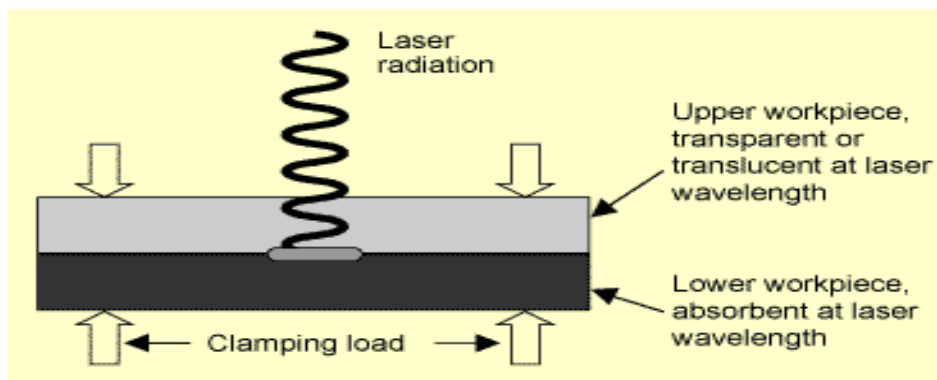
Through-Transmission Laser Welding - Cross-Section through the Welding Process [10]
